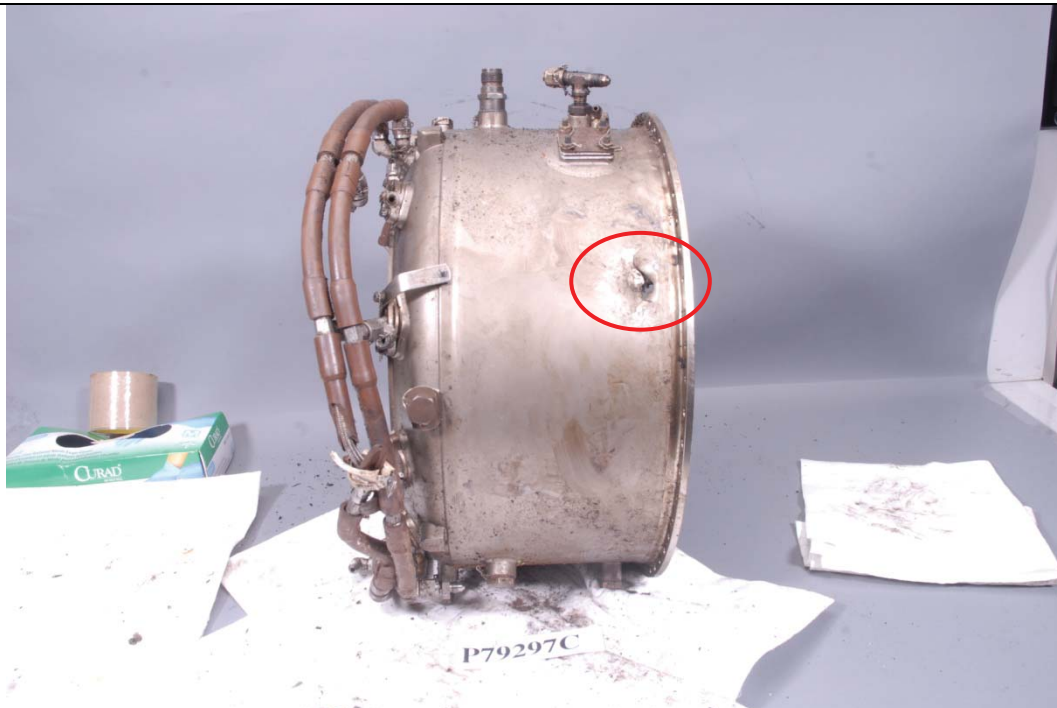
P-79297C, Combustor Section Assembly, FLA
